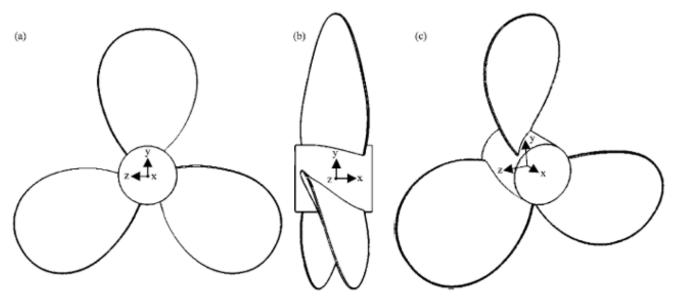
(a-c): Wageningen B series 3 blades propeller geometry (a) Front, (b) Side and (c) 3-D view
